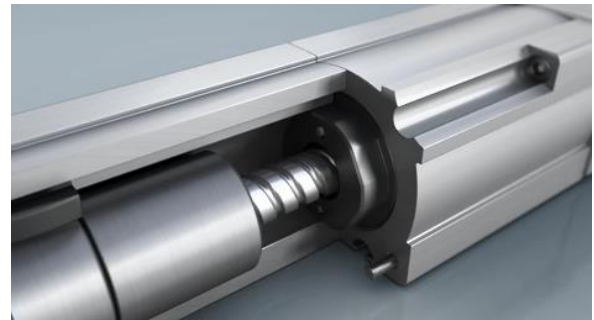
Inside view of an electric cylinder ([www.Festo.com](http://www.Festo.com))
